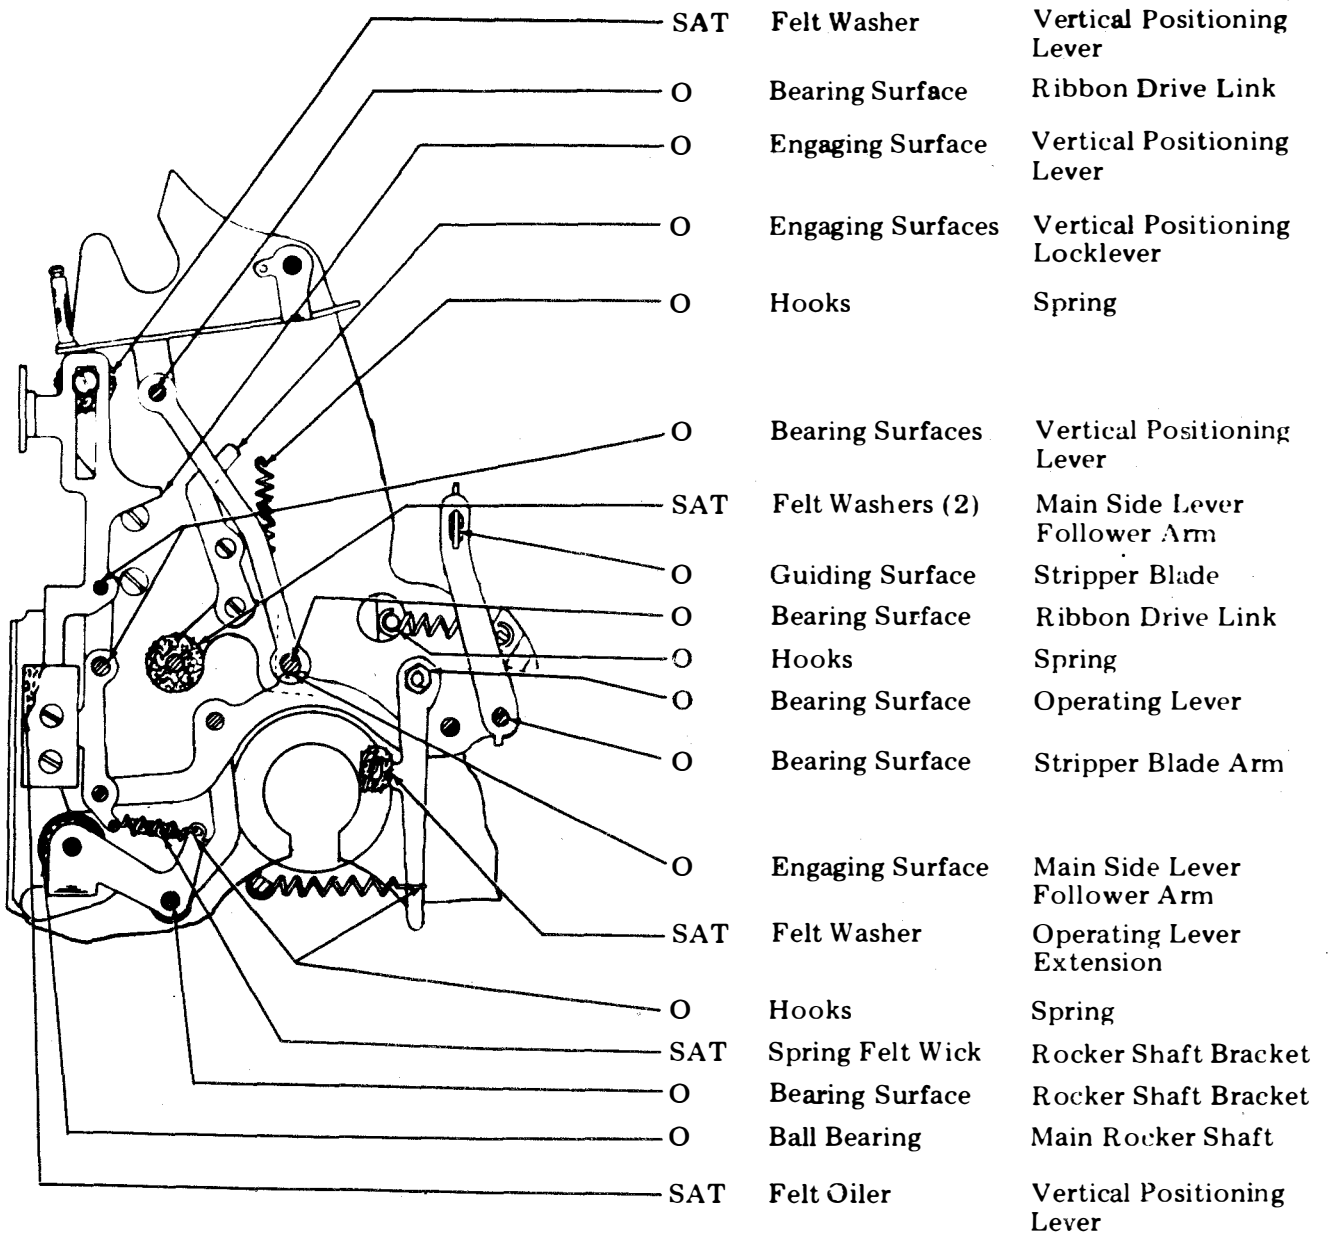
Vertical Positioning Mechanism, Right Side View
